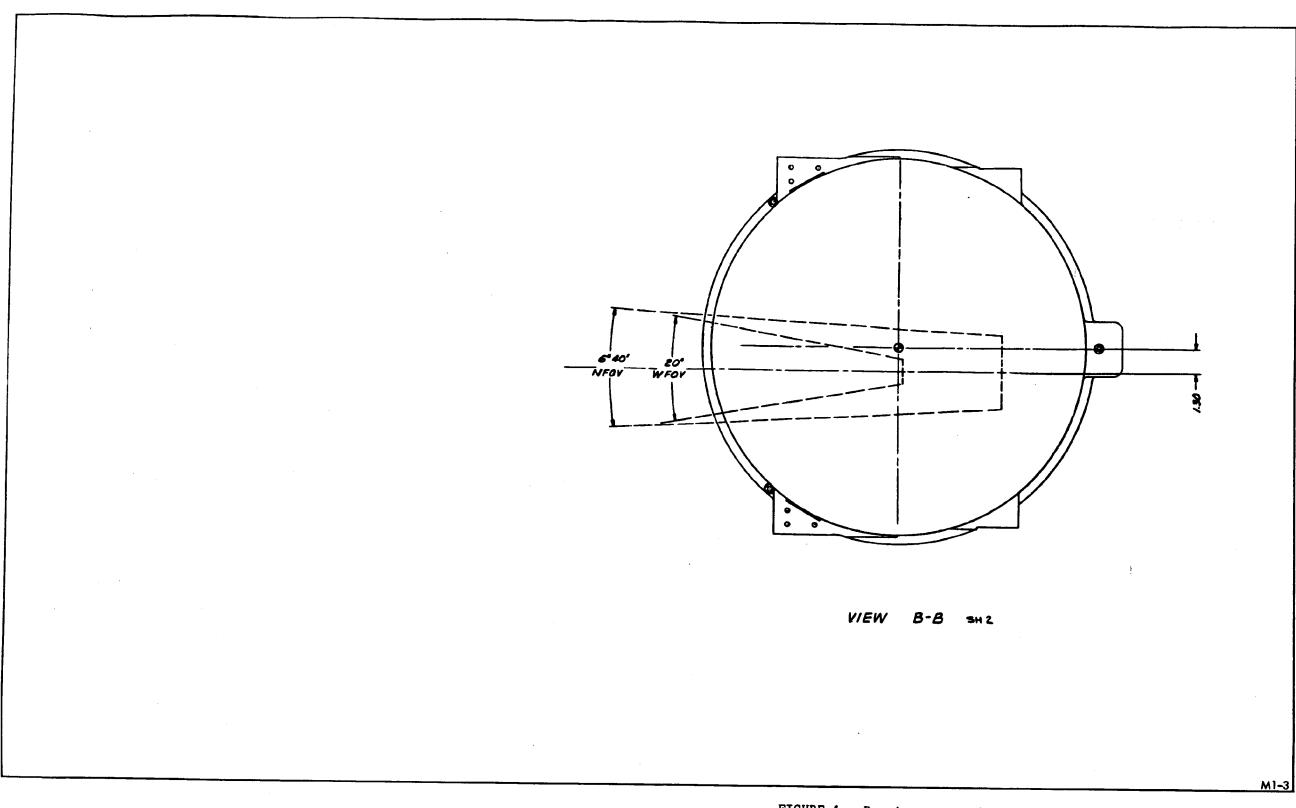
Receiver converter, outline drawing. (sheet 3 of 5)
